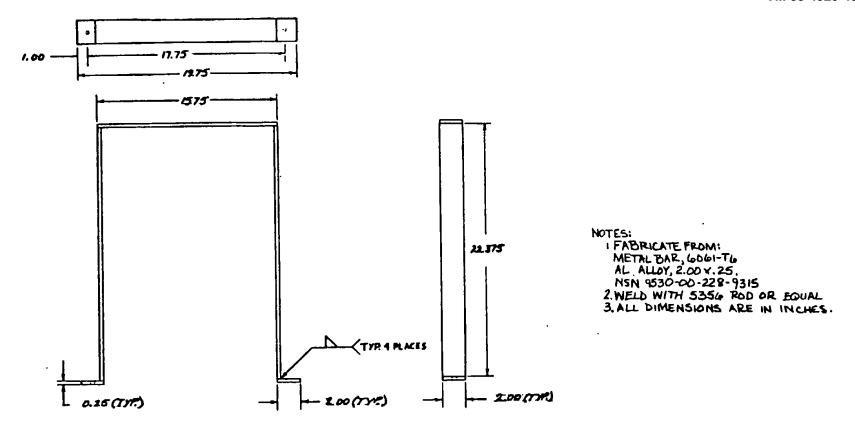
Exhaust Gas Tester Bracket Part No. 20083274
